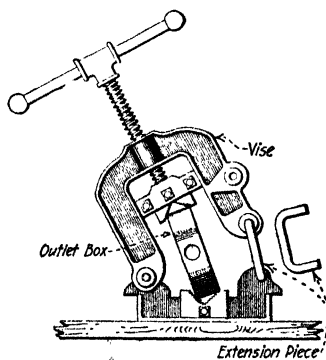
Showing how vise may be used to hold an outlet box. The extension piece may be made from $\frac{3}{8}$ in. round reinforcing steel.
